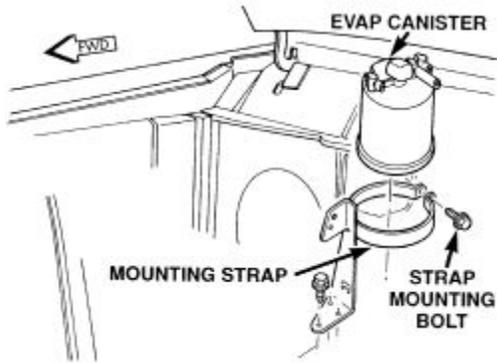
Exploded view of the EVAP cannister and related components-1996 Cherokee model shown
